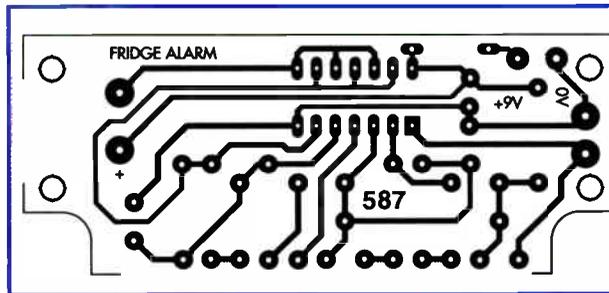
Full-size etching pattern for the Fridge Door-Open Alarm PC board.
